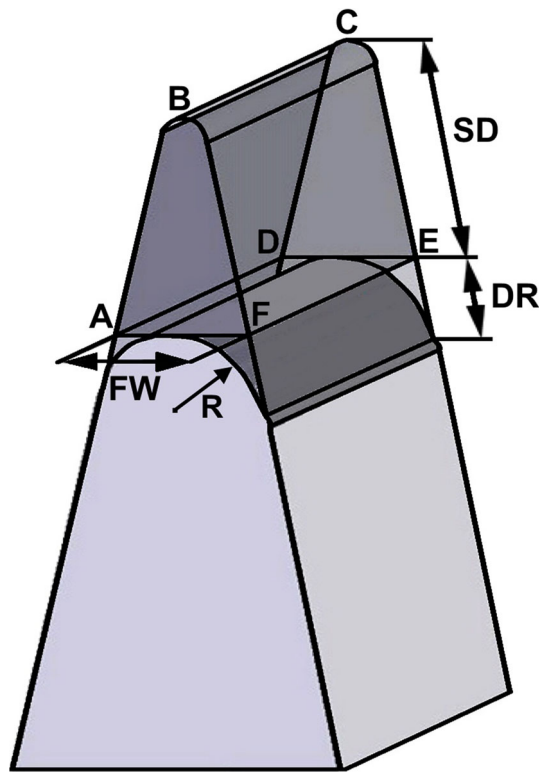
Scheme for calculating the total wear of the cutting edge knife: worn edge displacement (SD), rake face wear (DR), and worn front-end width (FW)
